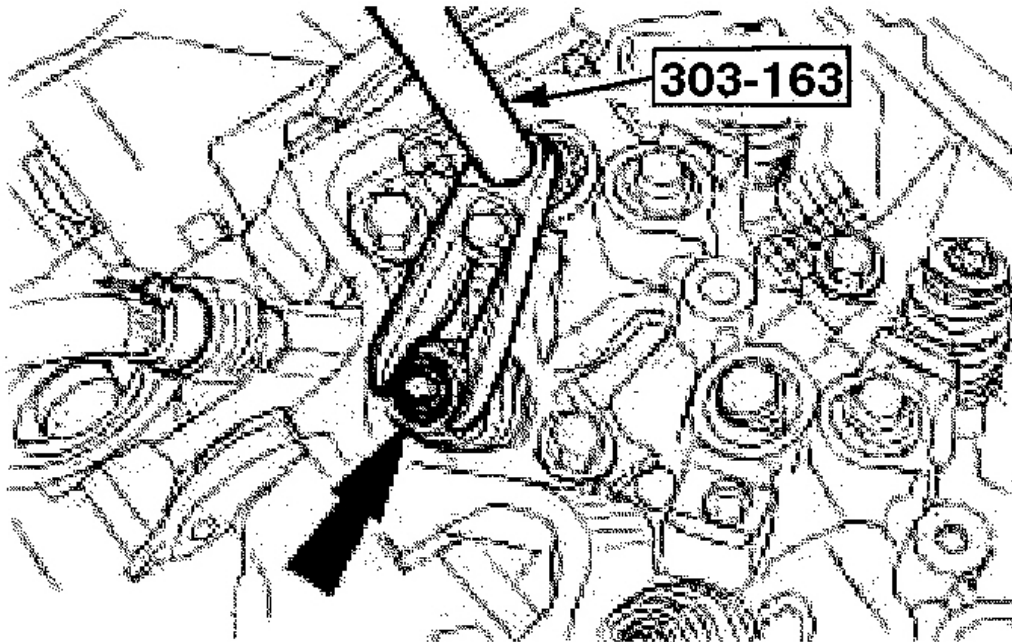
Compressing Valve Spring And Removing Valve Spring Retainer Key And Valve Spring
